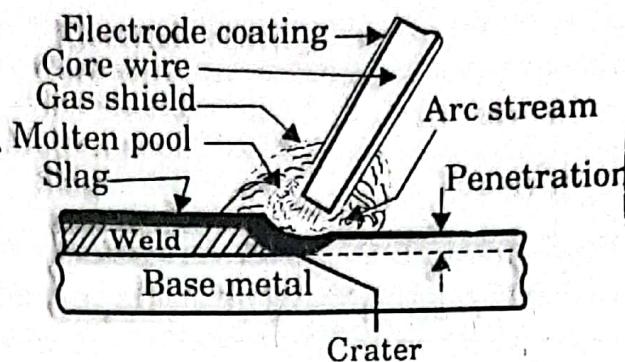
Schematic diagram of shielded metal-arc welding.
